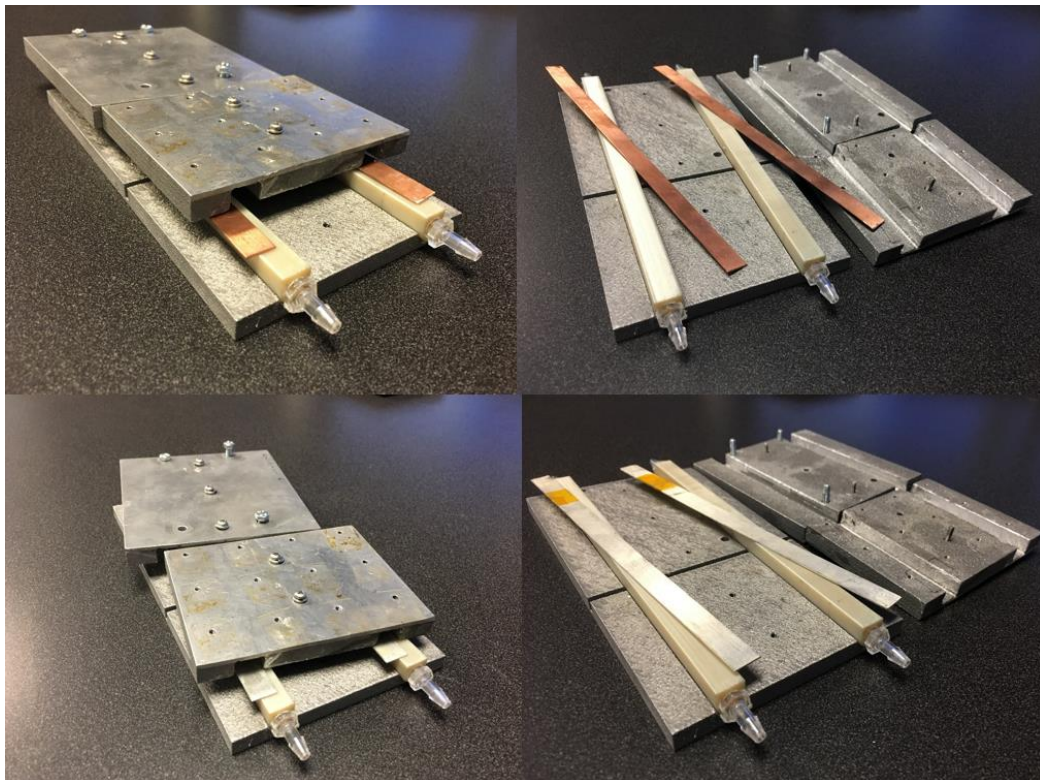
Exploded view of conventionally assembled cold plate including FDMed Ultem tube, gauge 20 copper (top row) or silver (bottom row) off-the-shelf plate, fastened with #4-40 screws torqued to 4.7 IN-LB.
